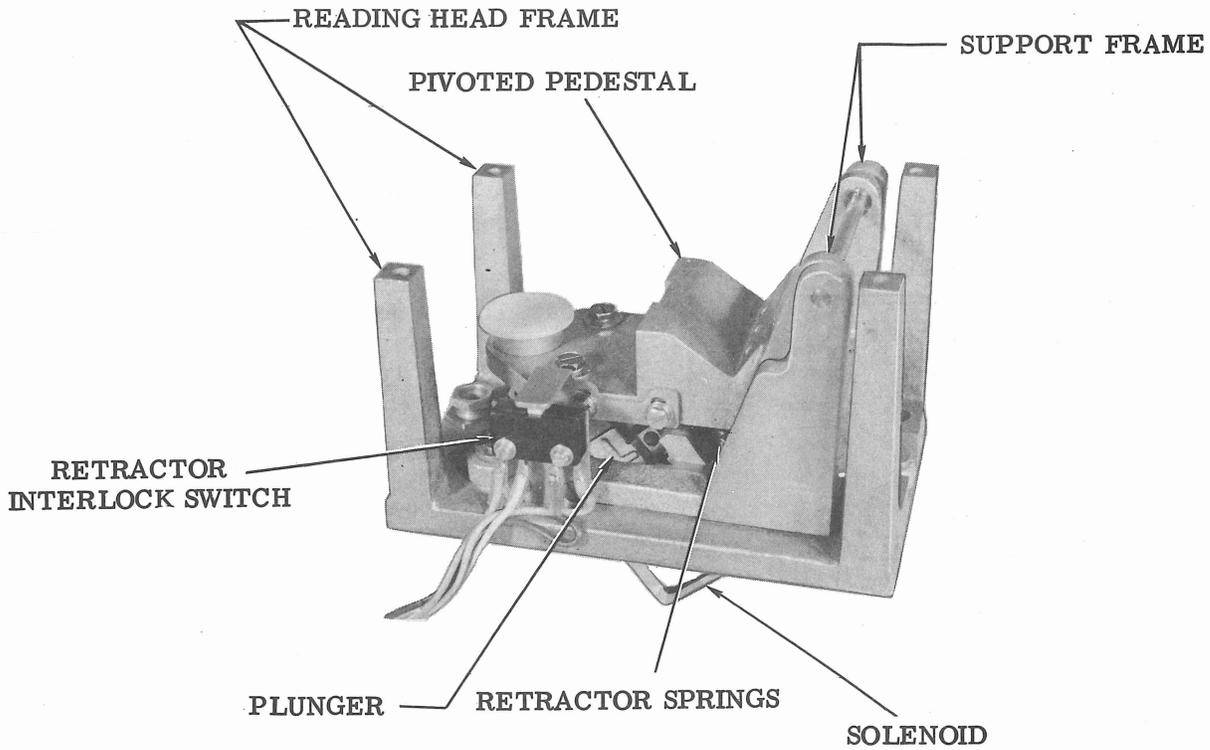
Retractor Mechanism (Without Code and Verify Contact Assemblies)
